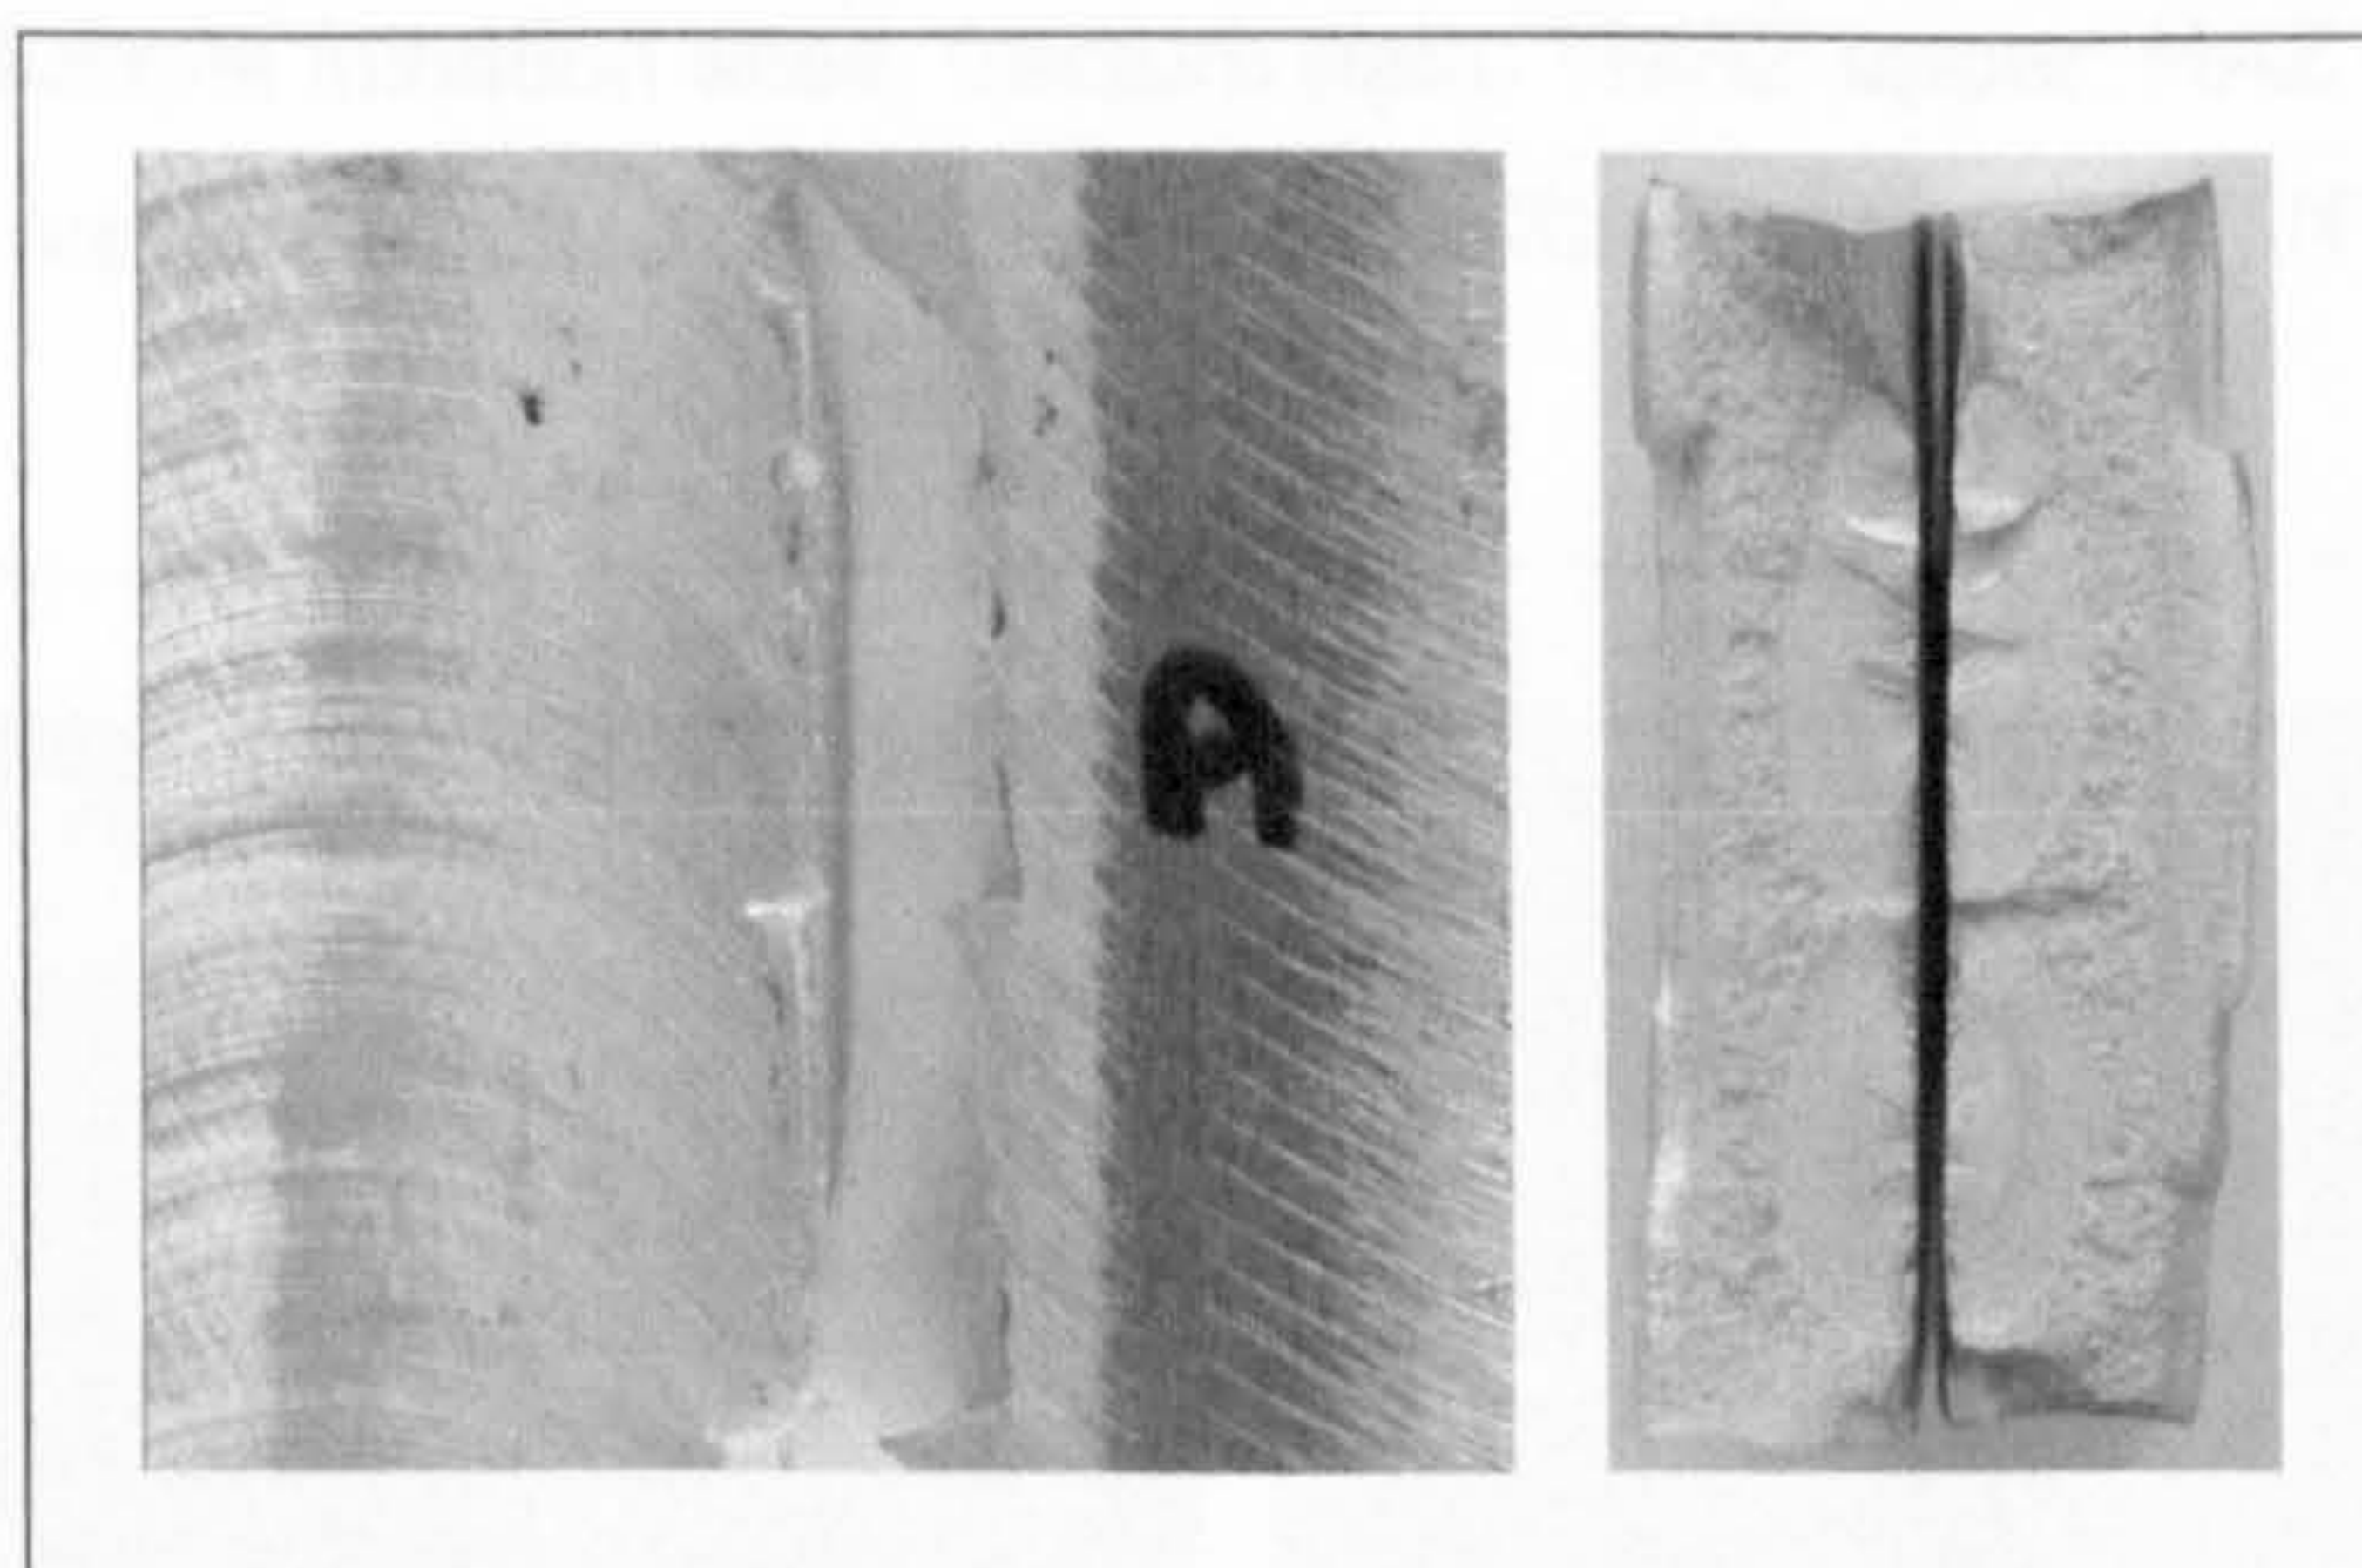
Fracture path near to advancing side tool shoulder edge (left) and fracture surfaces (right), (FS SP 5).
